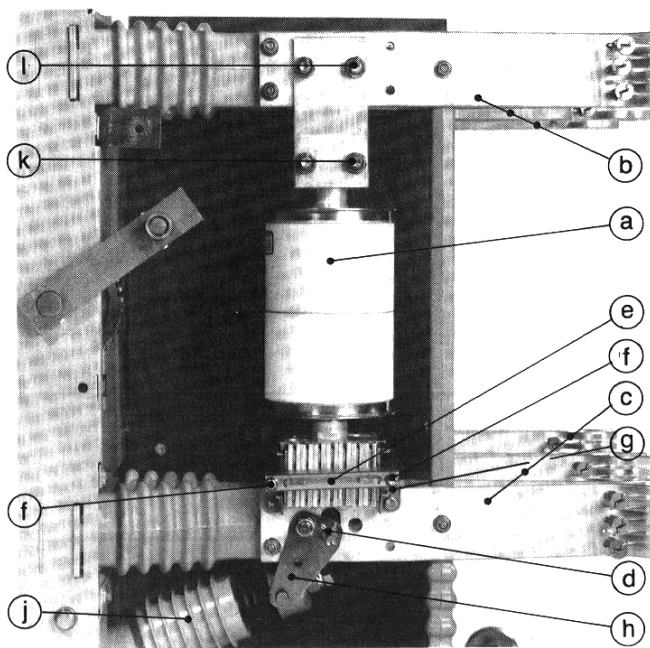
Typical Interrupter and Operating Rod Mechanism.
